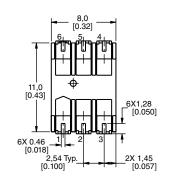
SMT Package Dimensional Drawings (For reference only: mm [in].)
